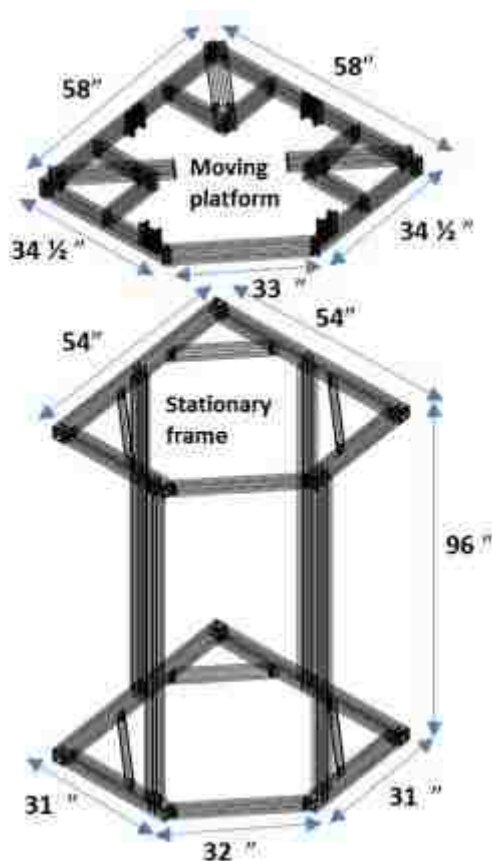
Exploded view of RPT Calibration technique mechanical structure
